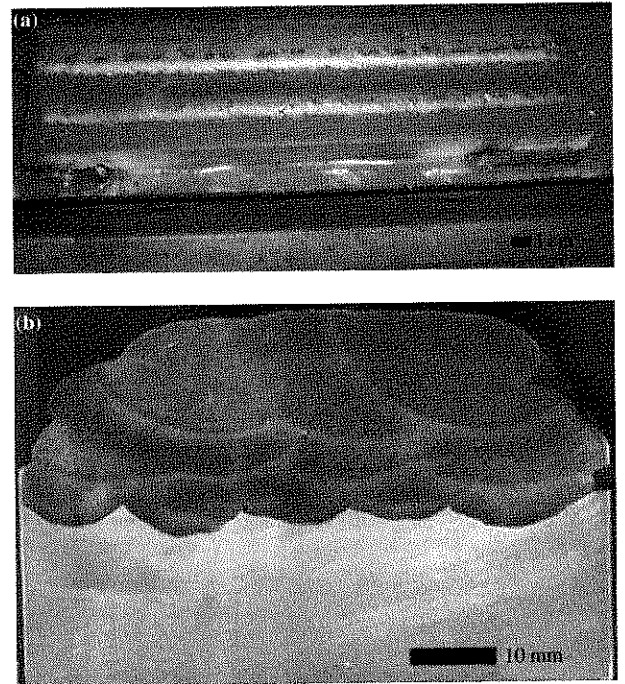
(a) Welded test piece. (b) Cross-section of the welded test piece.
